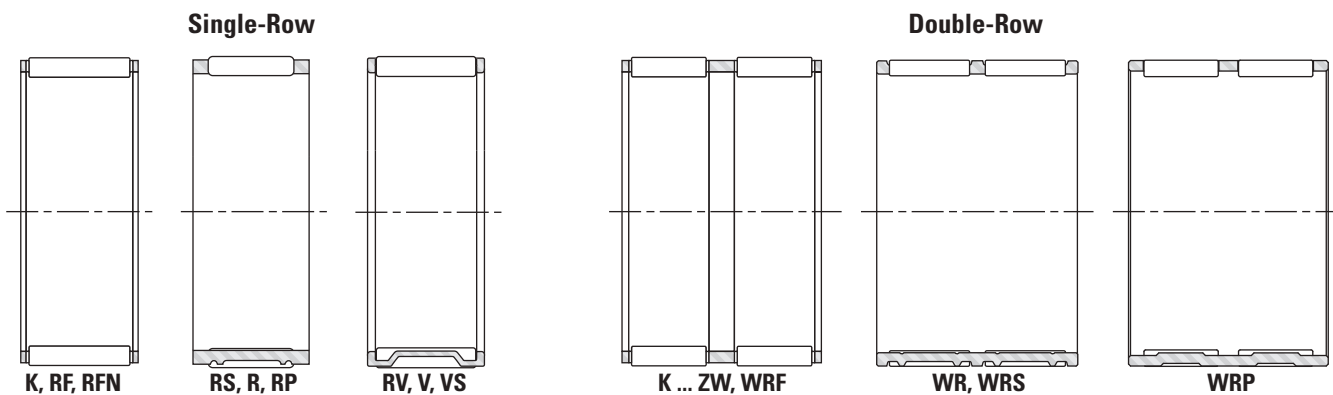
Types of Metric Series Radial Needle Roller and Cage Assemblies
